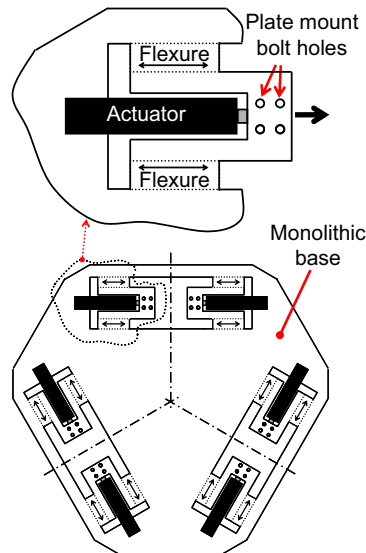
Top view of groove guide flexure bearings as machined within monolithic block
